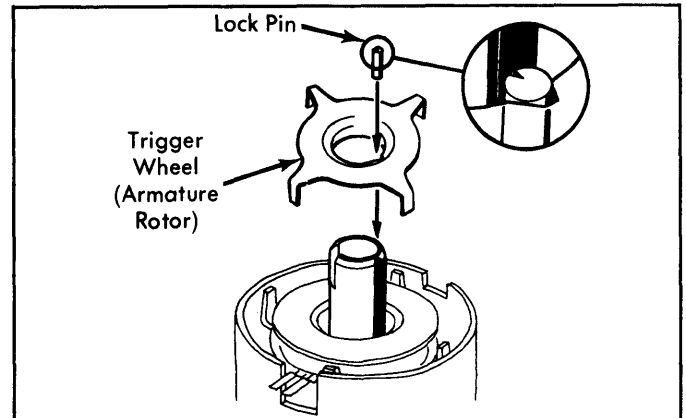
Installing Trigger Wheel (Armature) & Lock Pin
